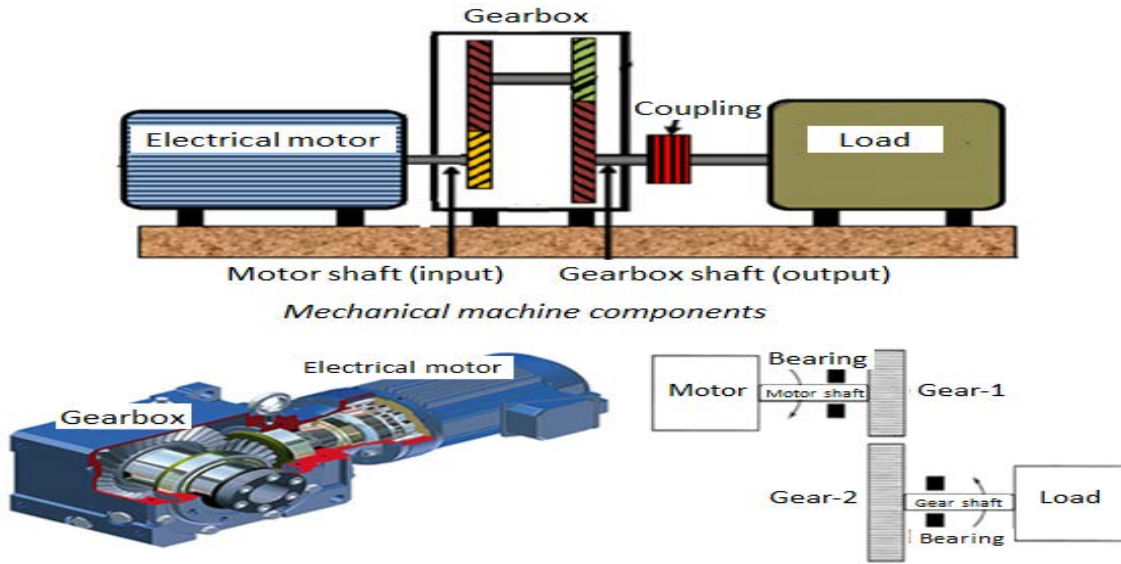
Schematic of gearbox connected to motor [42], [43].
